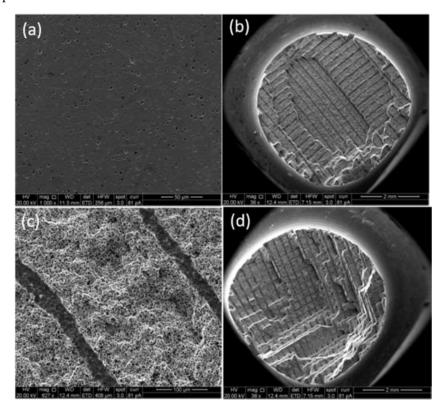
SEM observations of (a) bulk material from grips of the 0° tensile sample, (b) 90° machined fracture surface, (c) higher resolution image of 90° fracture surface and (d) 60° fracture surface.
